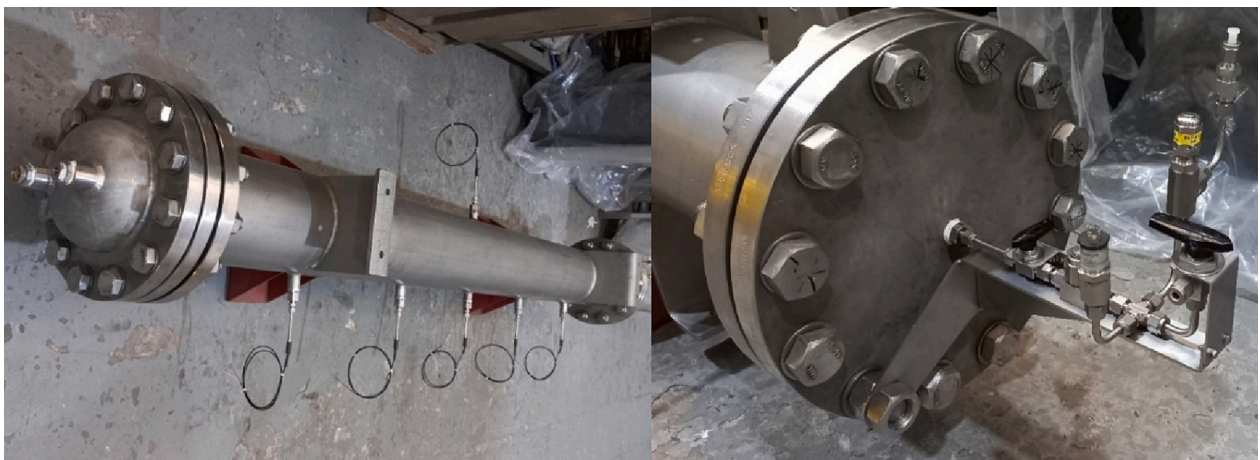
General view of the assembled hydrogen storage tank with the heating/cooling flange on the forefront (left) and gas input/output flange (right).
